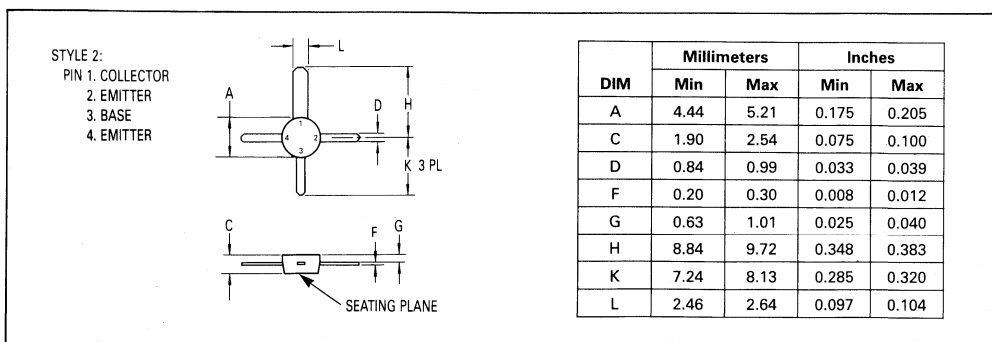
Case Outline Drawing of the PowerMacro Package
